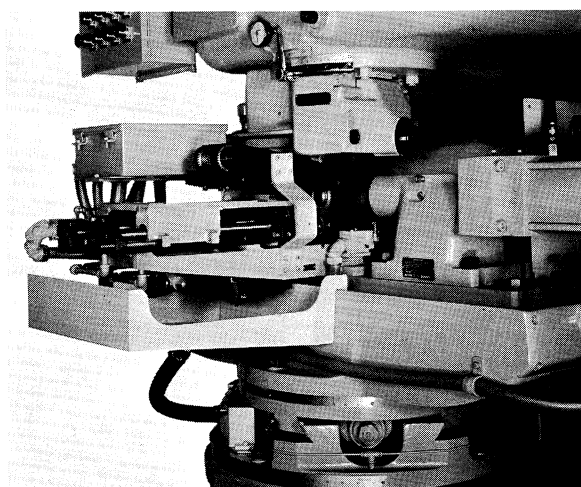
Basic type of slide-type automatic loader for rotary gear shavers.
